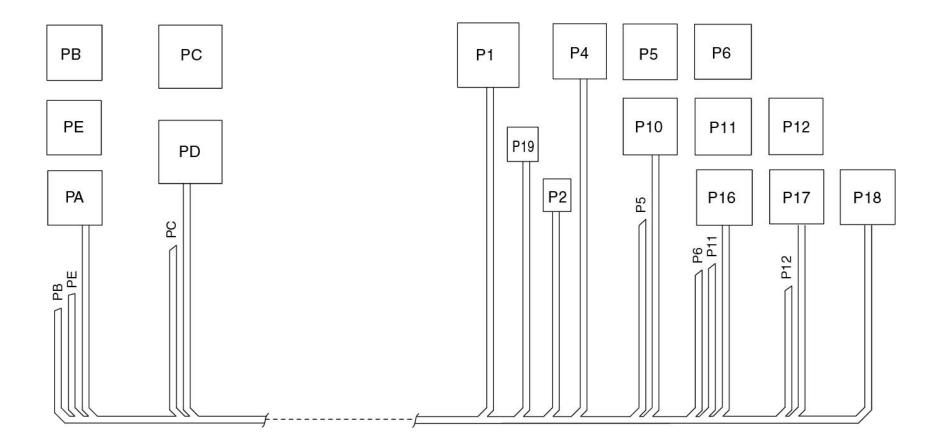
Cable Assembly Block Diagram, P/N 11401-001
